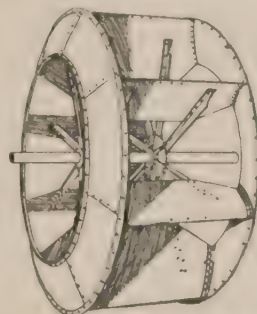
PADDLE WHEEL FAN OR BLOWER.
